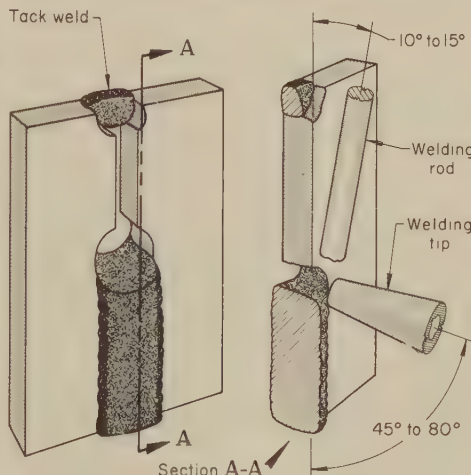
Keyholing technique used for vertical welding of sheet up to  $\frac{1}{8}$  in. thick
